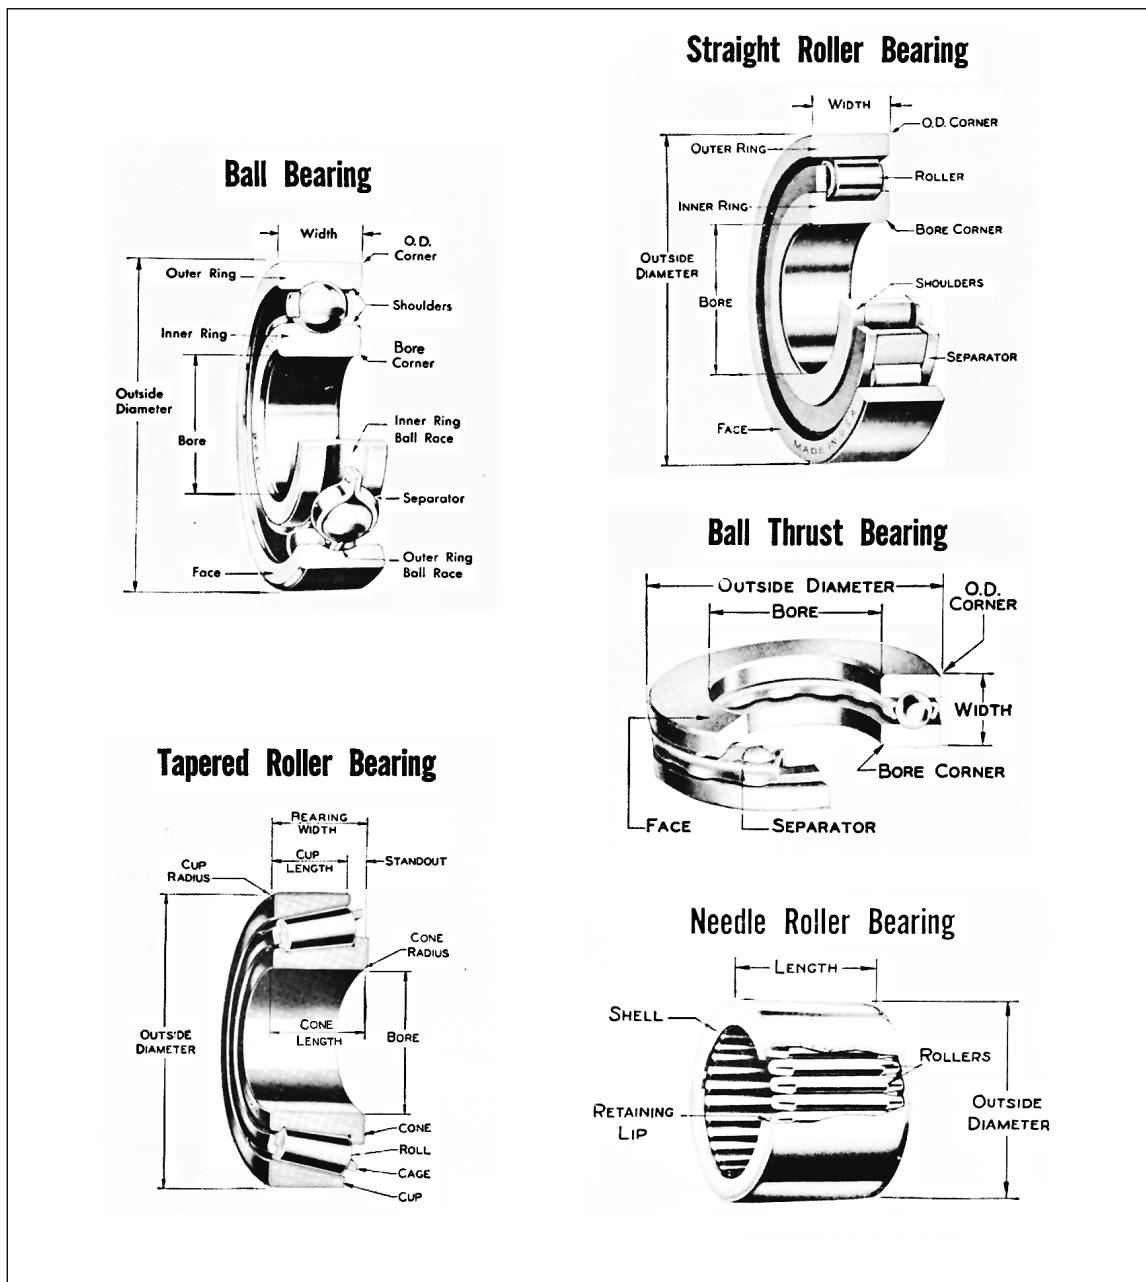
Bearing parts and their names. (Anti-friction Bearing Manufacturers Assoc. Inc.)
